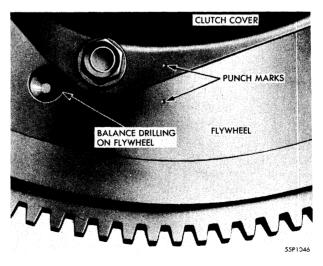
Punch Marks on Clutch Cover and Flywheel
